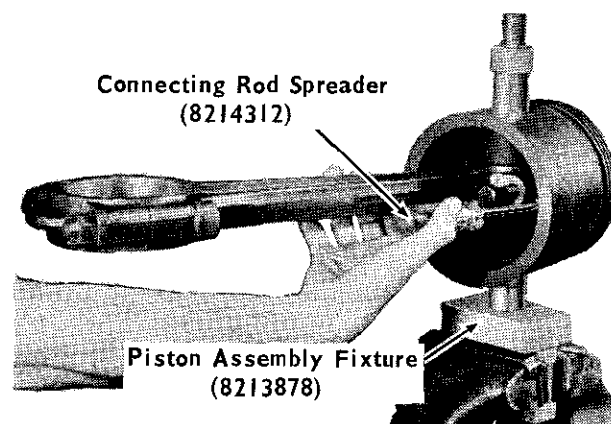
Piston Assembly Fixture And Rod Spreader
